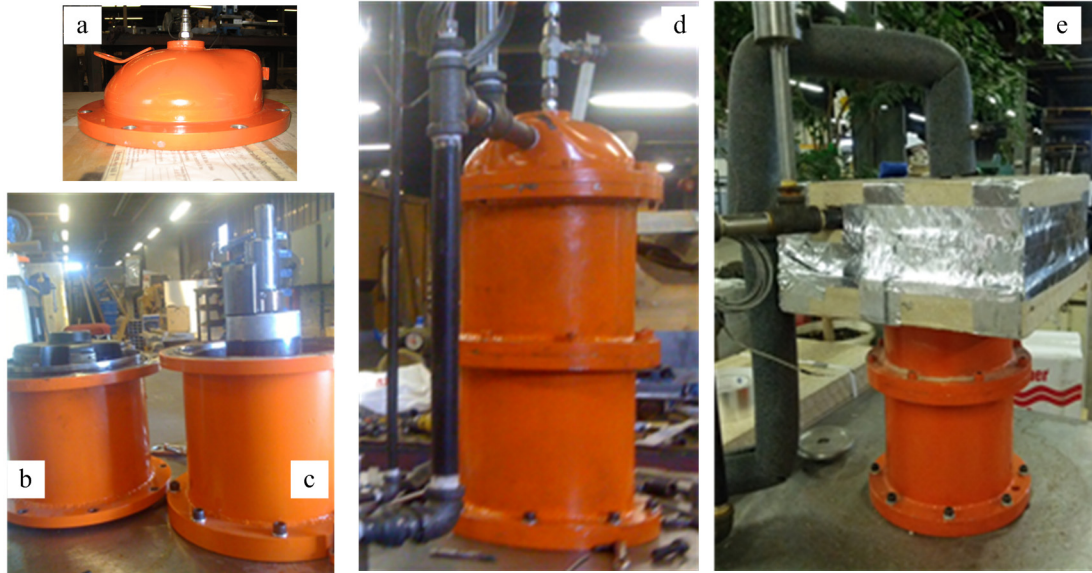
Detail photograph of the expander housing: a) upper cap, b) top body, c) bottom body, d) assembled expander, e) thermal insulation.
